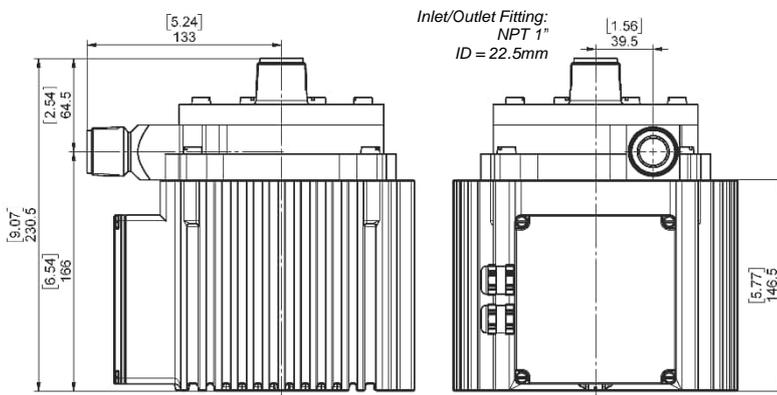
Dimensions of motor with pump head LPP-2000.2 (PP+GF30 Housing, PFA Impeller)
